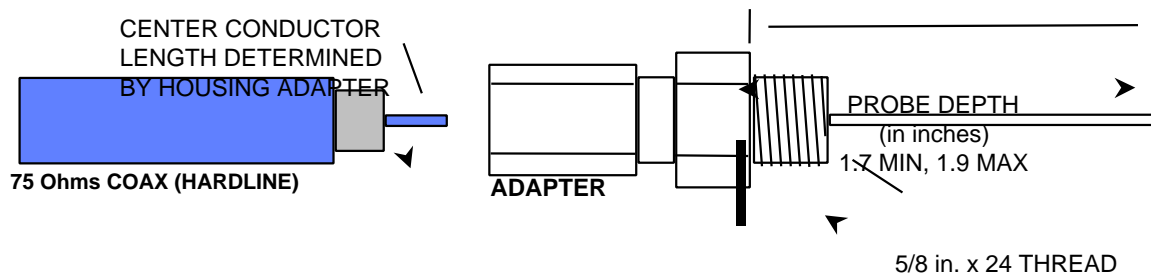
Typical Housing-to-Hardline Connector Interface
